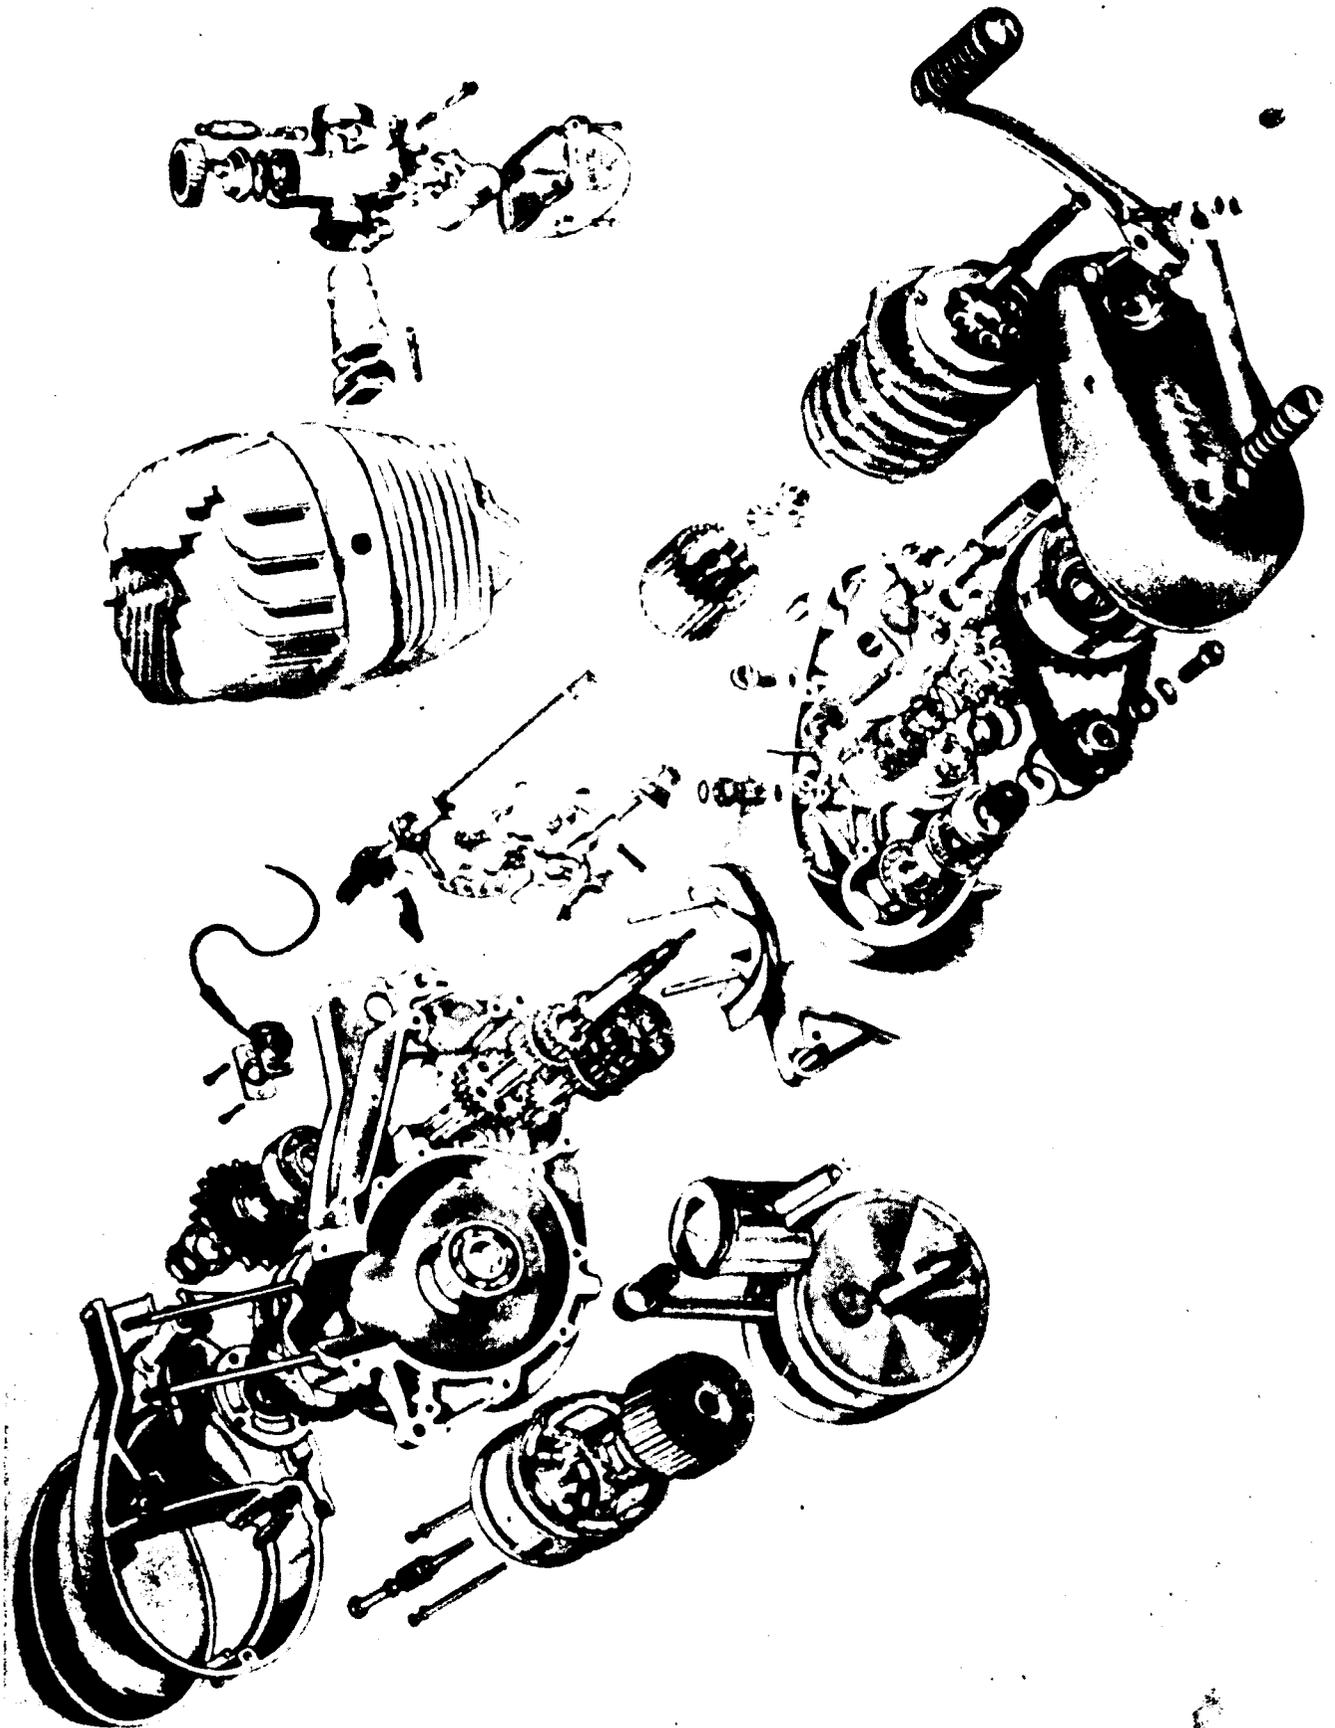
Exploded view of the engines MM 125/3 - 150/3 (with revolution counter drive)
